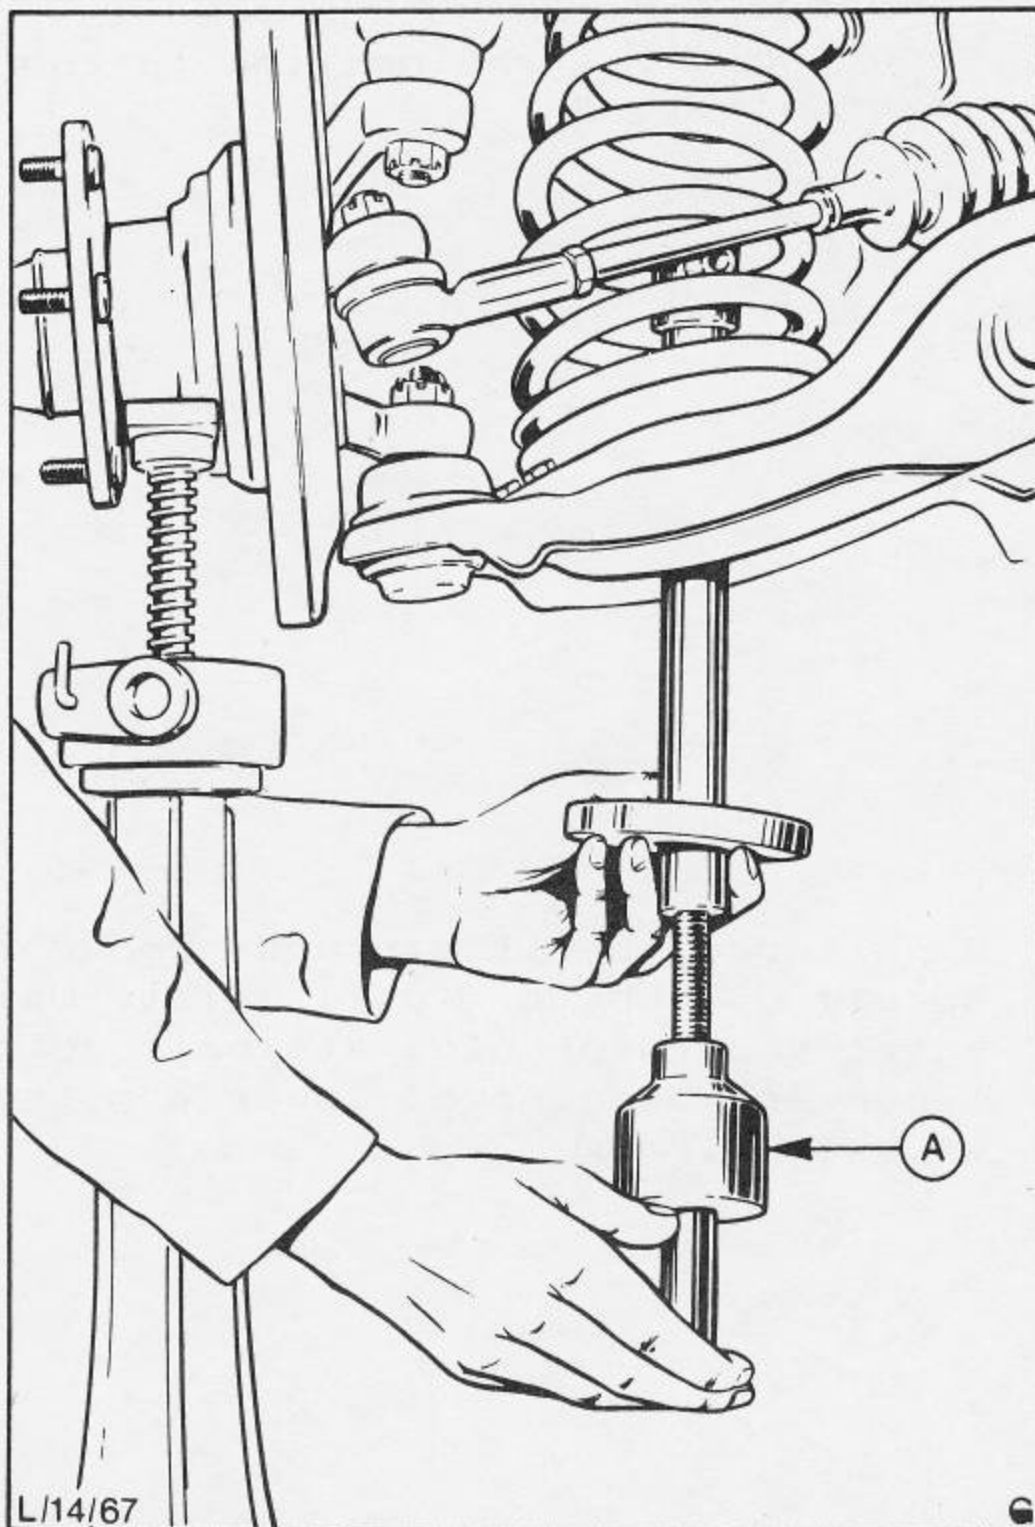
Positioning Tool No.14-006 'A' inside spring.
